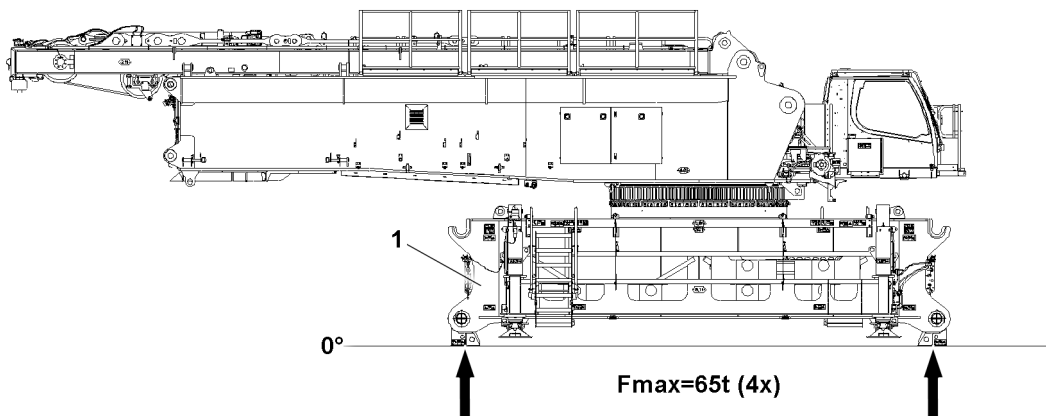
Observe the maximum force  $F_{max} = 65 \text{ t}$  per bearing eye with continuous assembly.
